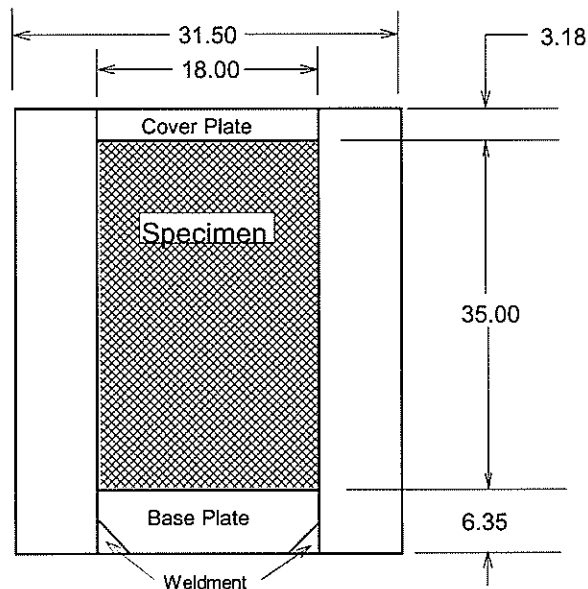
Test specimen with aluminum sleeve and cover plates (dimensions in mm).
